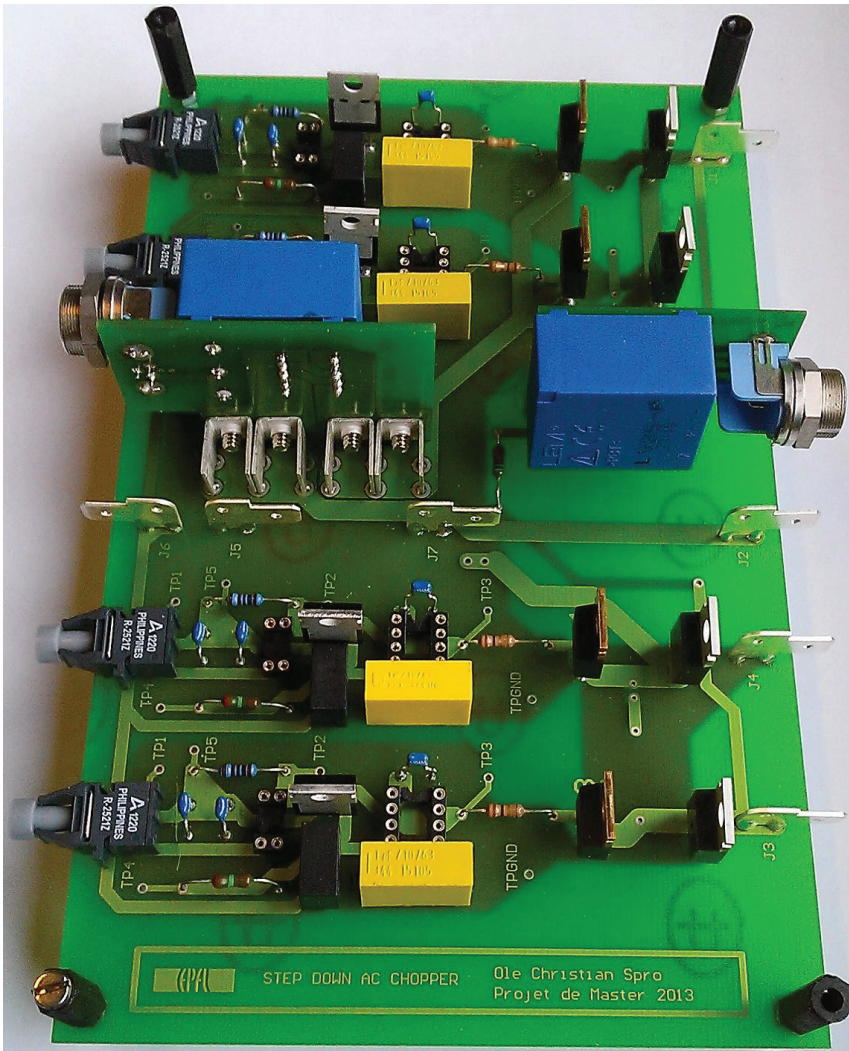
Overview of the PCB with the soldered components. The MOSFETs and the diodes are depicted without their heat sinks. The silk overlay layer seen in the figure of the designed PCB are not visible in the finished product since the manufacturer did not possess the equipment to do so. The bottom logo, test points and contact indicators are visible since they were added to the copper layer in the PCB design. The indicators makes it easier for the user to identify and operate the prototype.
